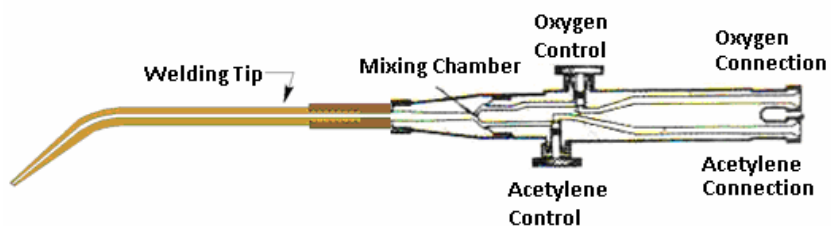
High pressure (equal Pressure) type of welding torch
